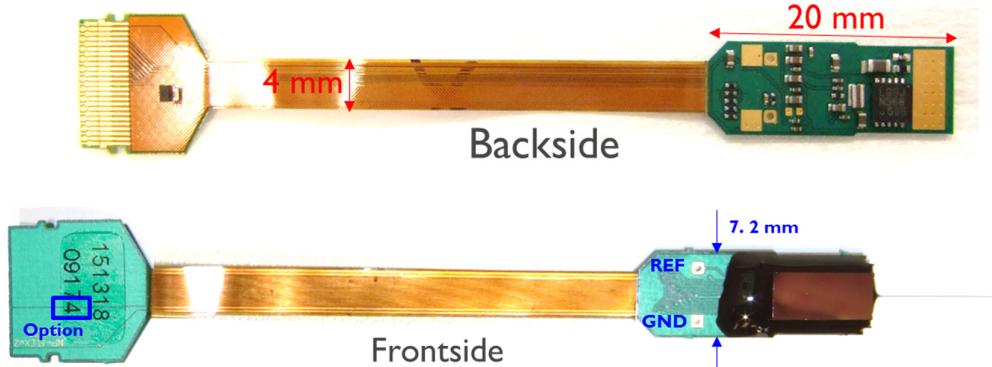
Flex PCB with assembled components: top: backside, bottom: frontside (with probe).
